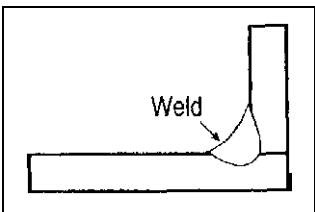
Corner weld from inside — poor inside, worst outside
